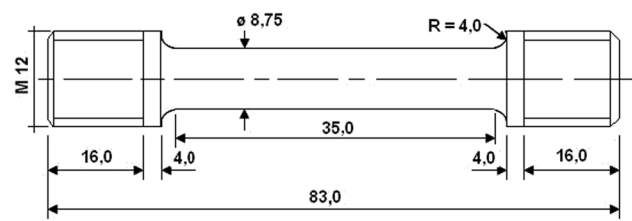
Geometry and dimensions are given in millimeters of the specimen used in the tensile test
